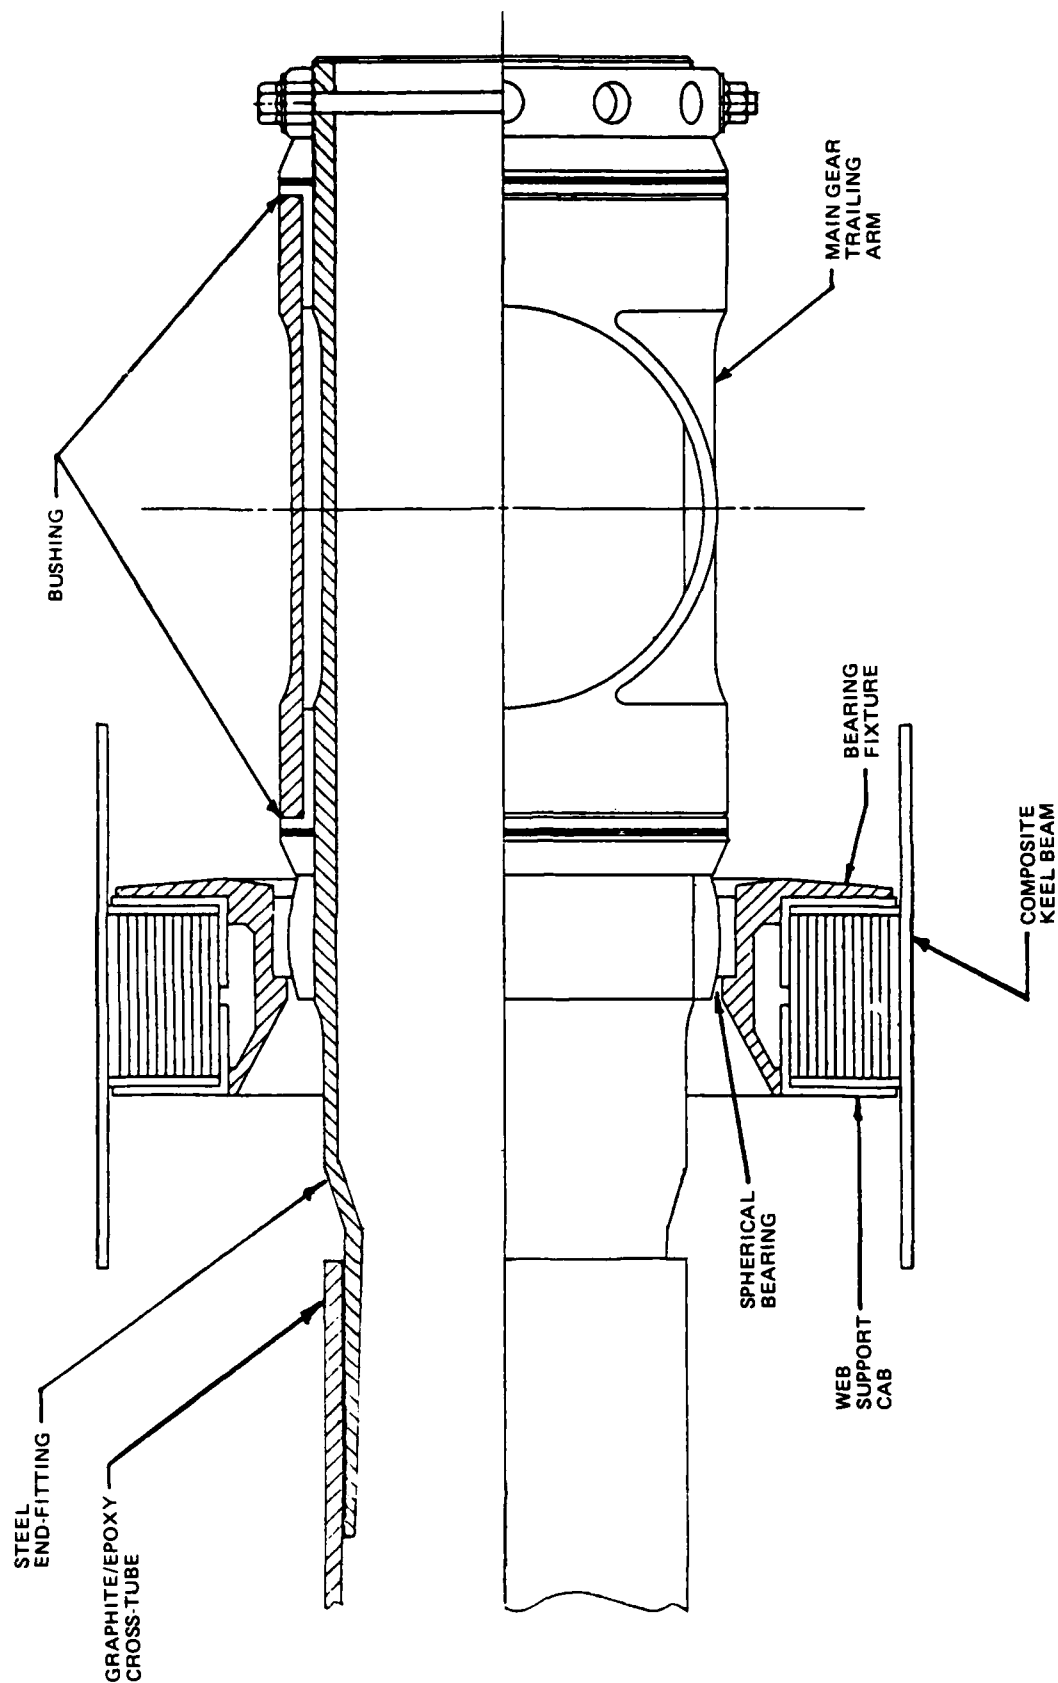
Assembly of graphite/epoxy cross tube and steel trailing arm of crashworthy uncoupled landing gear.
